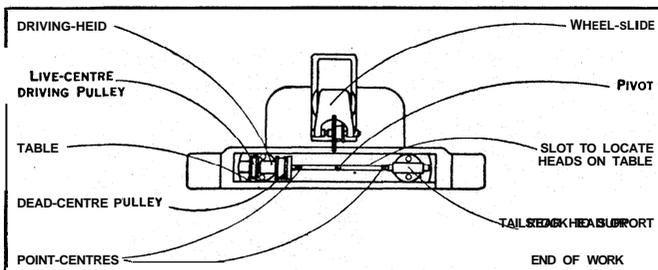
PLAN VIEW SHOWING THE PRINCIPLE OF A UNIVERSAL CYLINDRICAL GRINDING MACHINE
